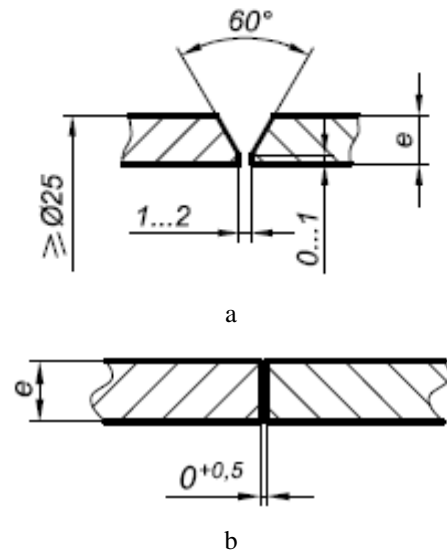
Welding edge preparation: a) for manual welding; b) for automatic welding
